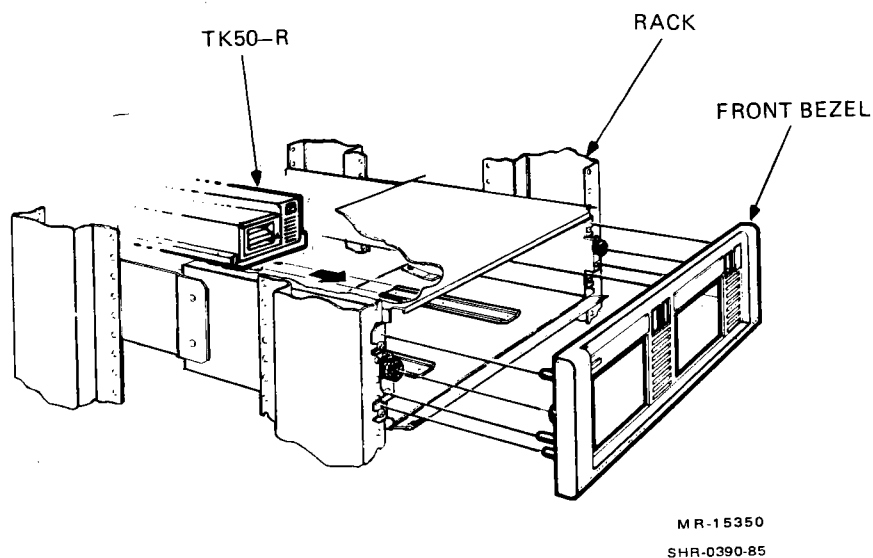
Installing a TK50-R in a Rackmount Assembly
